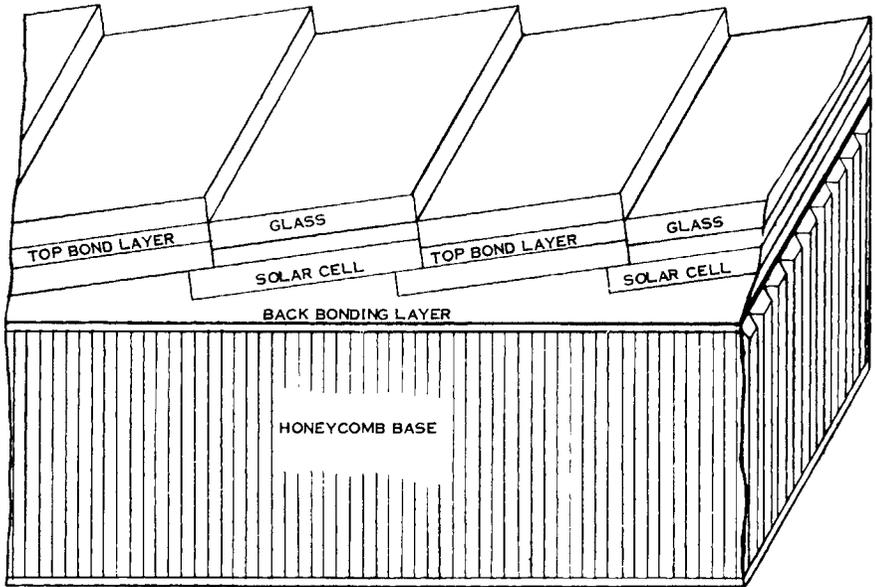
EXPLODED VIEW OF PADDLE SEGMENT
